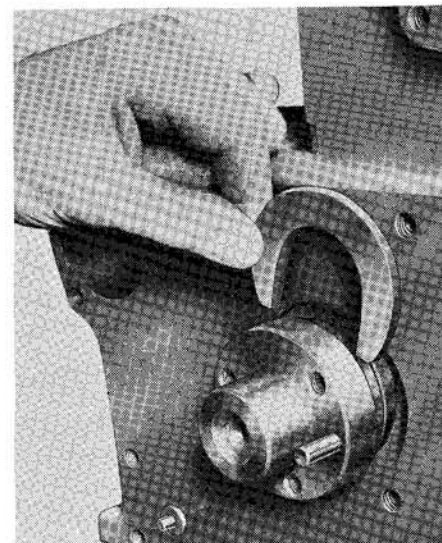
Timing gears were retained to earlier type camshaft with three cap screws and dowel pin and camshaft end thrust was taken by split or horseshoe type washer fitted into groove in camshaft. Refer to Fig. 34 for later camshaft and timing gear arrangement.
